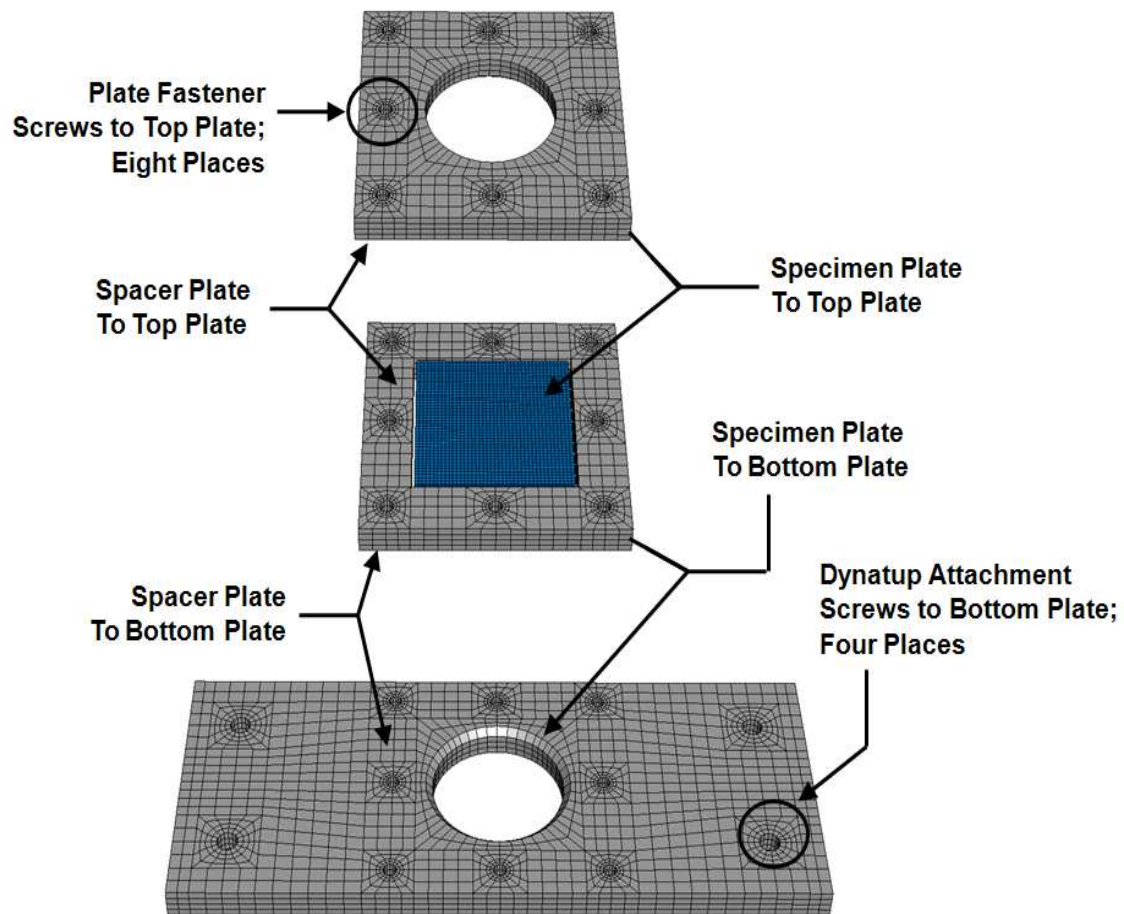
Illustration of selected contact areas between the plate fixture, specimen plates, and fastener screws.
